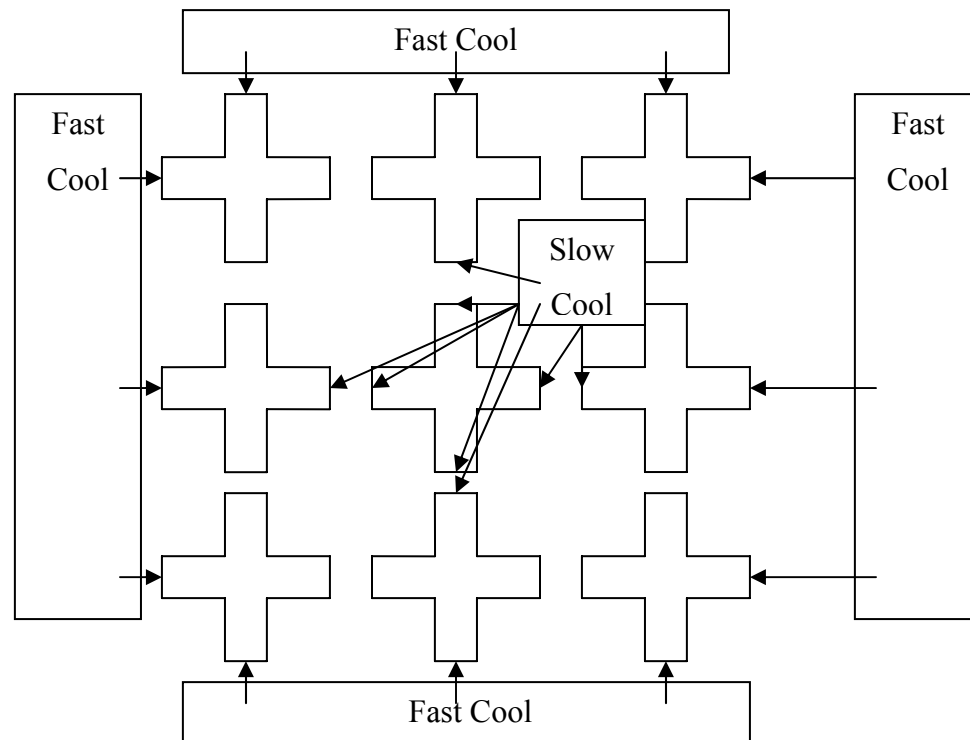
Illustration of cooling rate based on position. The inside propeller blades are surrounded by hot castings and will therefore cool slower.
